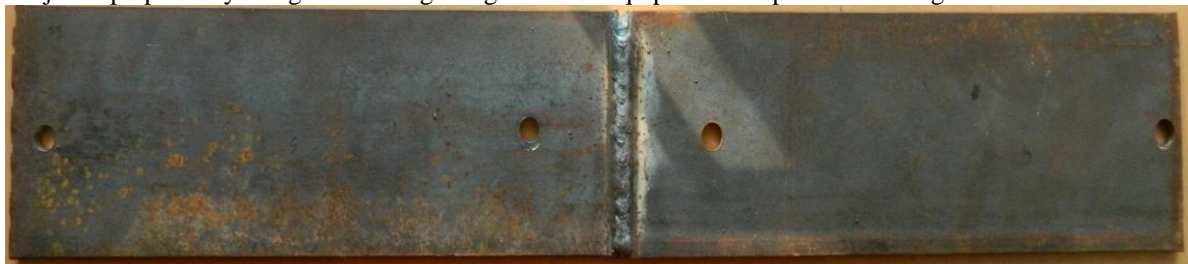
Butt welded joint prepared by vibratory welding
